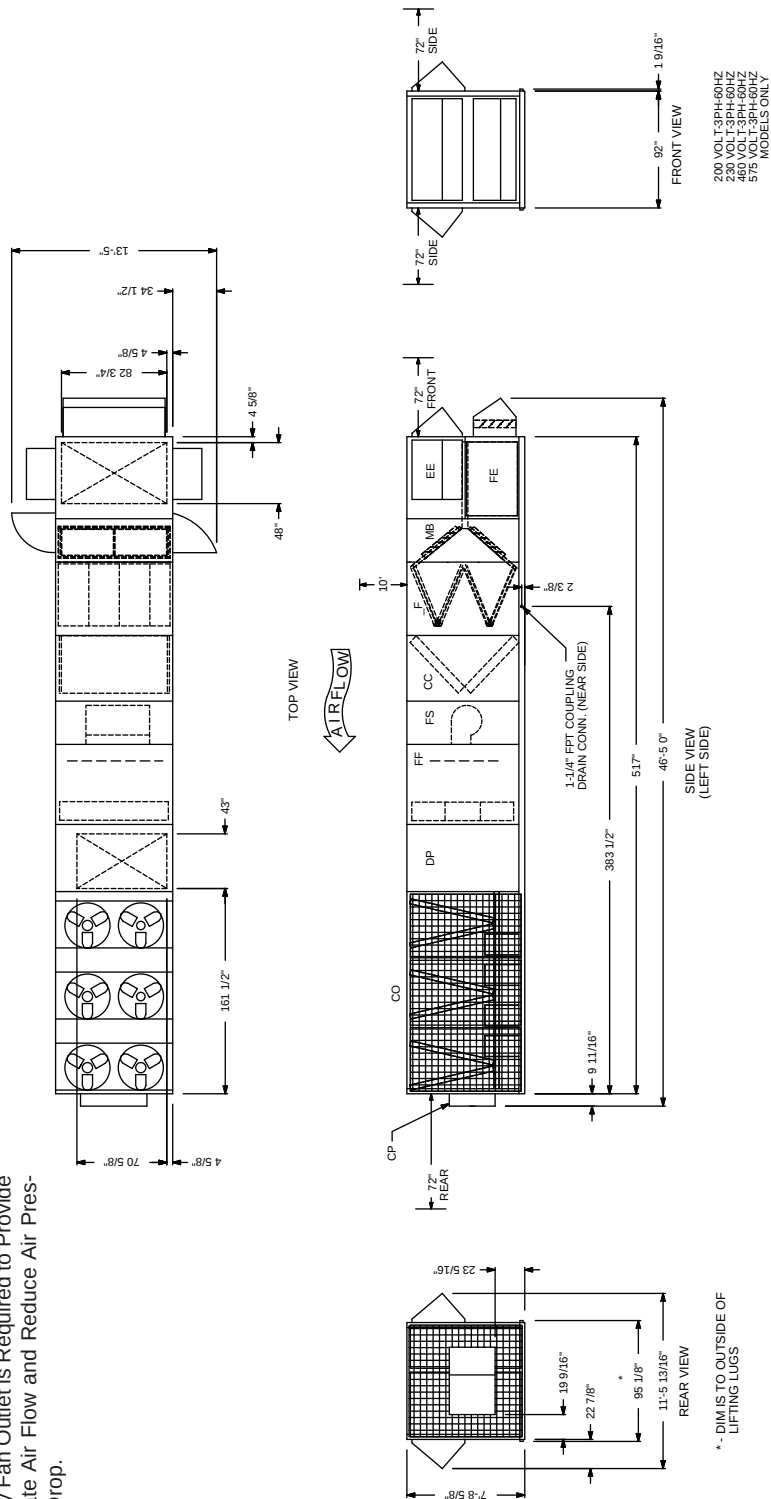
GENERAL ARRANGEMENT DRAWING
